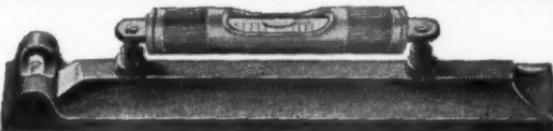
Adjustable type Machinists' Levels with ground and graduated vial. Grooved for use on shafting. Sizes 4", 6", 8", 12", 18".
